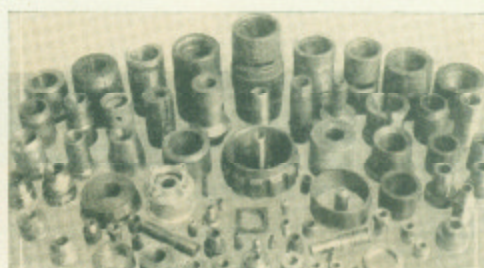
Bushings Made in the 9-inch Jr. Lathe
